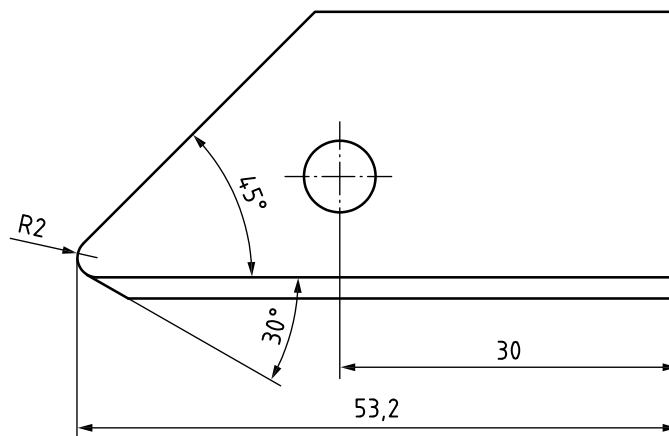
Front plate (Ref. No. 1 in Figure 1) of upper clamp
